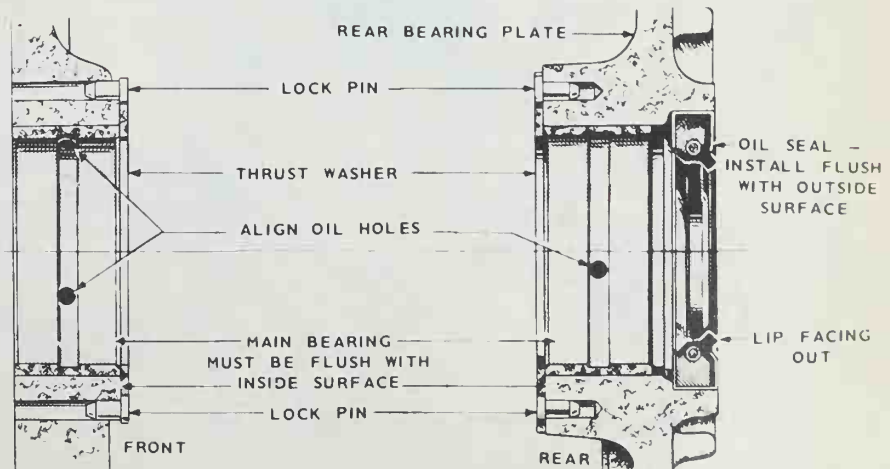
Cross-section view of crankshaft main bearings to show proper installation. Note rear oil seal placement.
